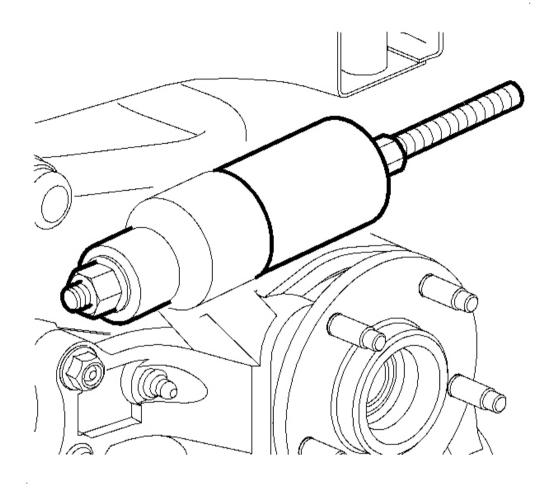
Upper Control Arm Bushing & Knuckle Assembly Courtesy of GENERAL MOTORS CORP.
